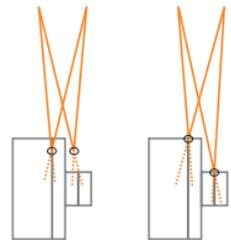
Radial welds with the 2-beam technique, left without and, right, with the dynamic lens.
